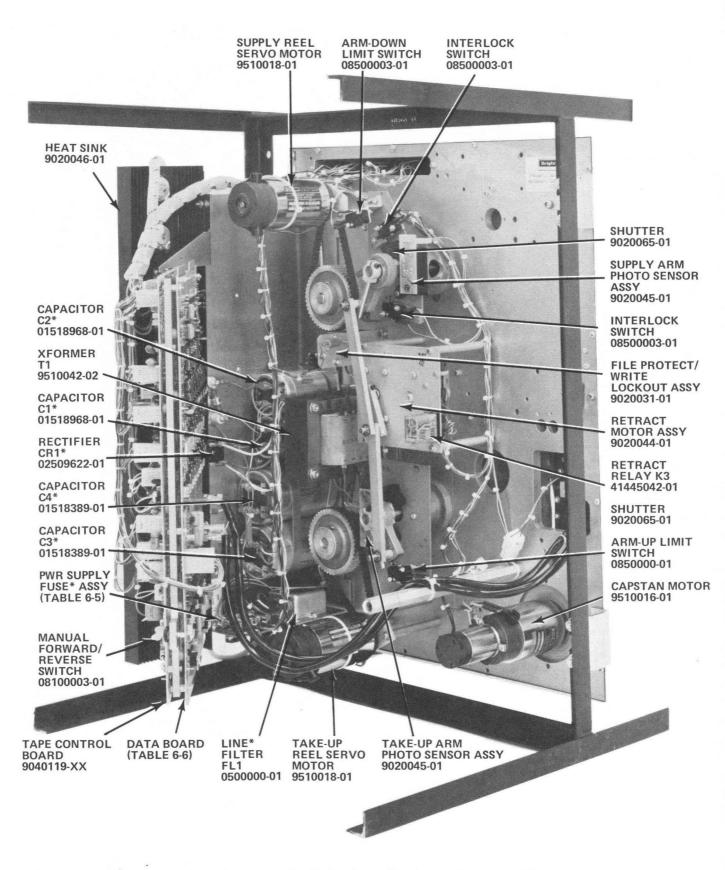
Model 2730 Tape Unit Mechanical Assembly
